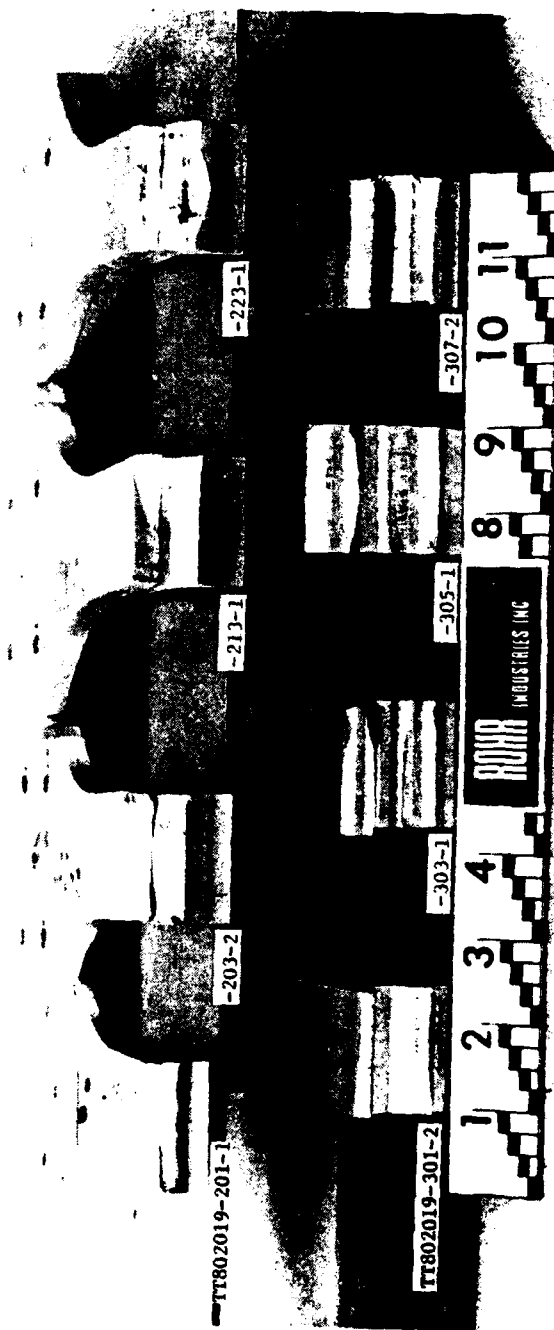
(790957-2) Typical Transverse Fillet Weld Axial Fatigue Specimen Failures Showing Fracture Surface Details
